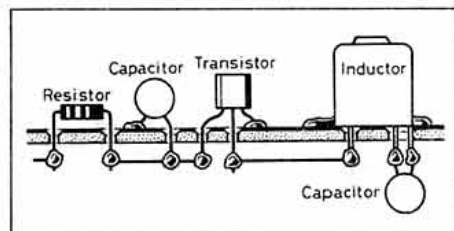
Wired-track construction on single-sided board, copper side uppermost
